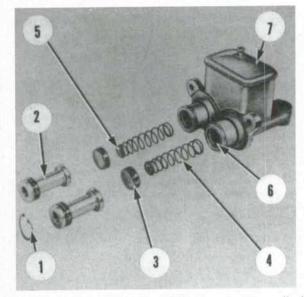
Exploded view of brake master cylinder assembly used on TW-5, TW-15 and TW-25 models.
